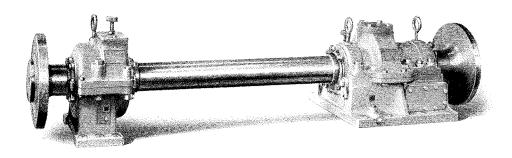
Line Shaft Bearing and Two-Shoe Thrust and Journal Bearing.
